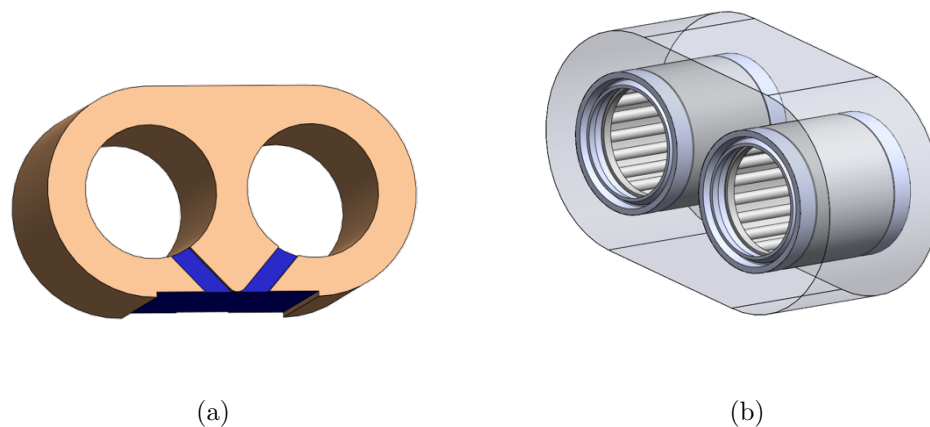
Design of the radial compensation block (a) Front side of the block with LP grooves (b) Radial block with roller bearings and shaft seals.
